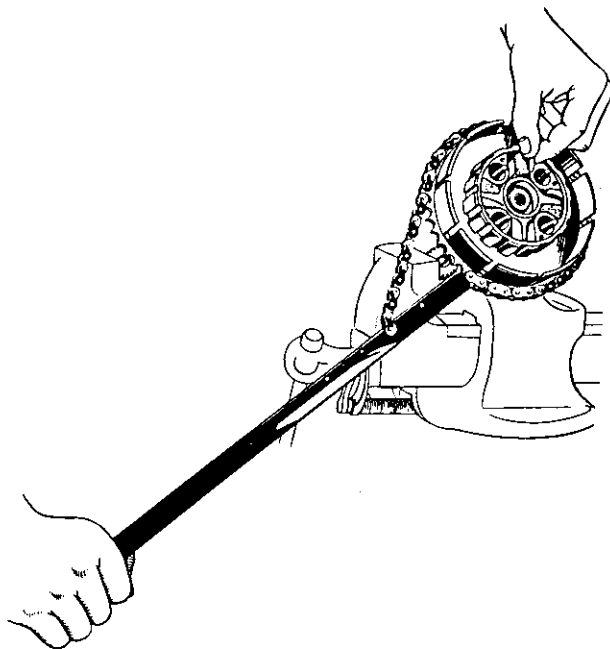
To replace Clutch Shock Absorber Rubbers.
